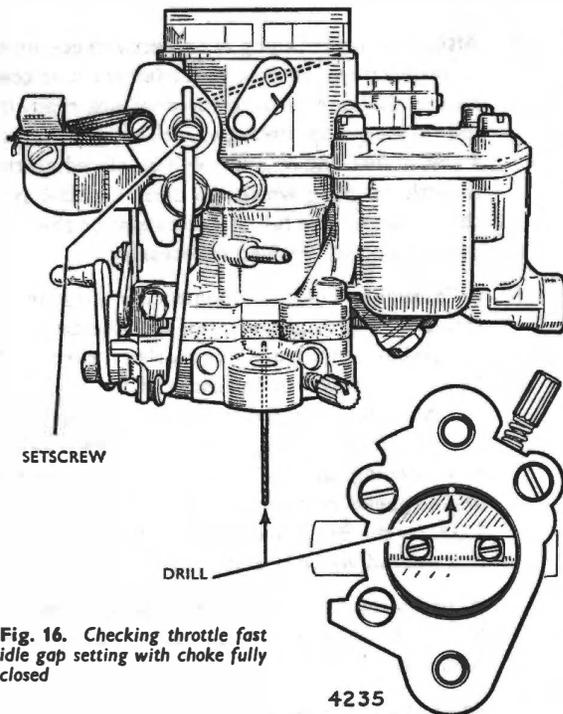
Checking throttle fast idle gap setting with choke fully closed
